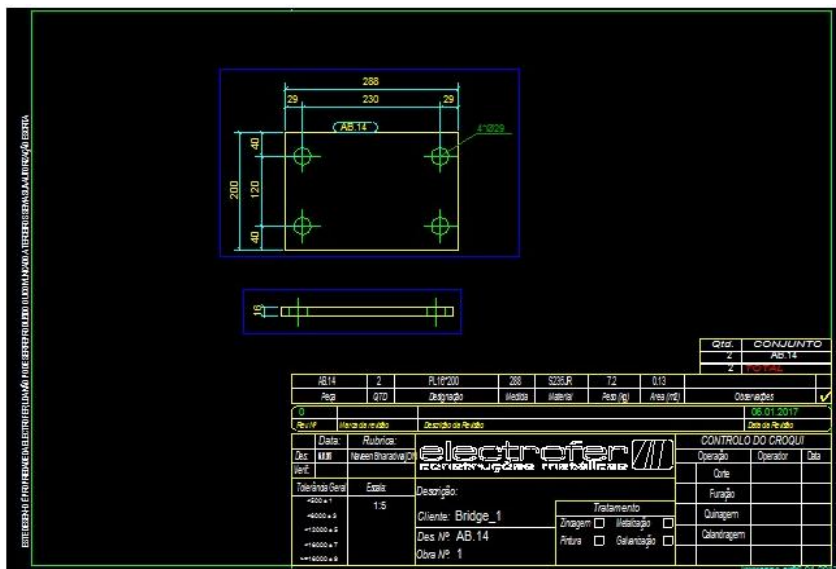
Parts converted to 2D drawing for manufacturing (Structures, Tekla.)
